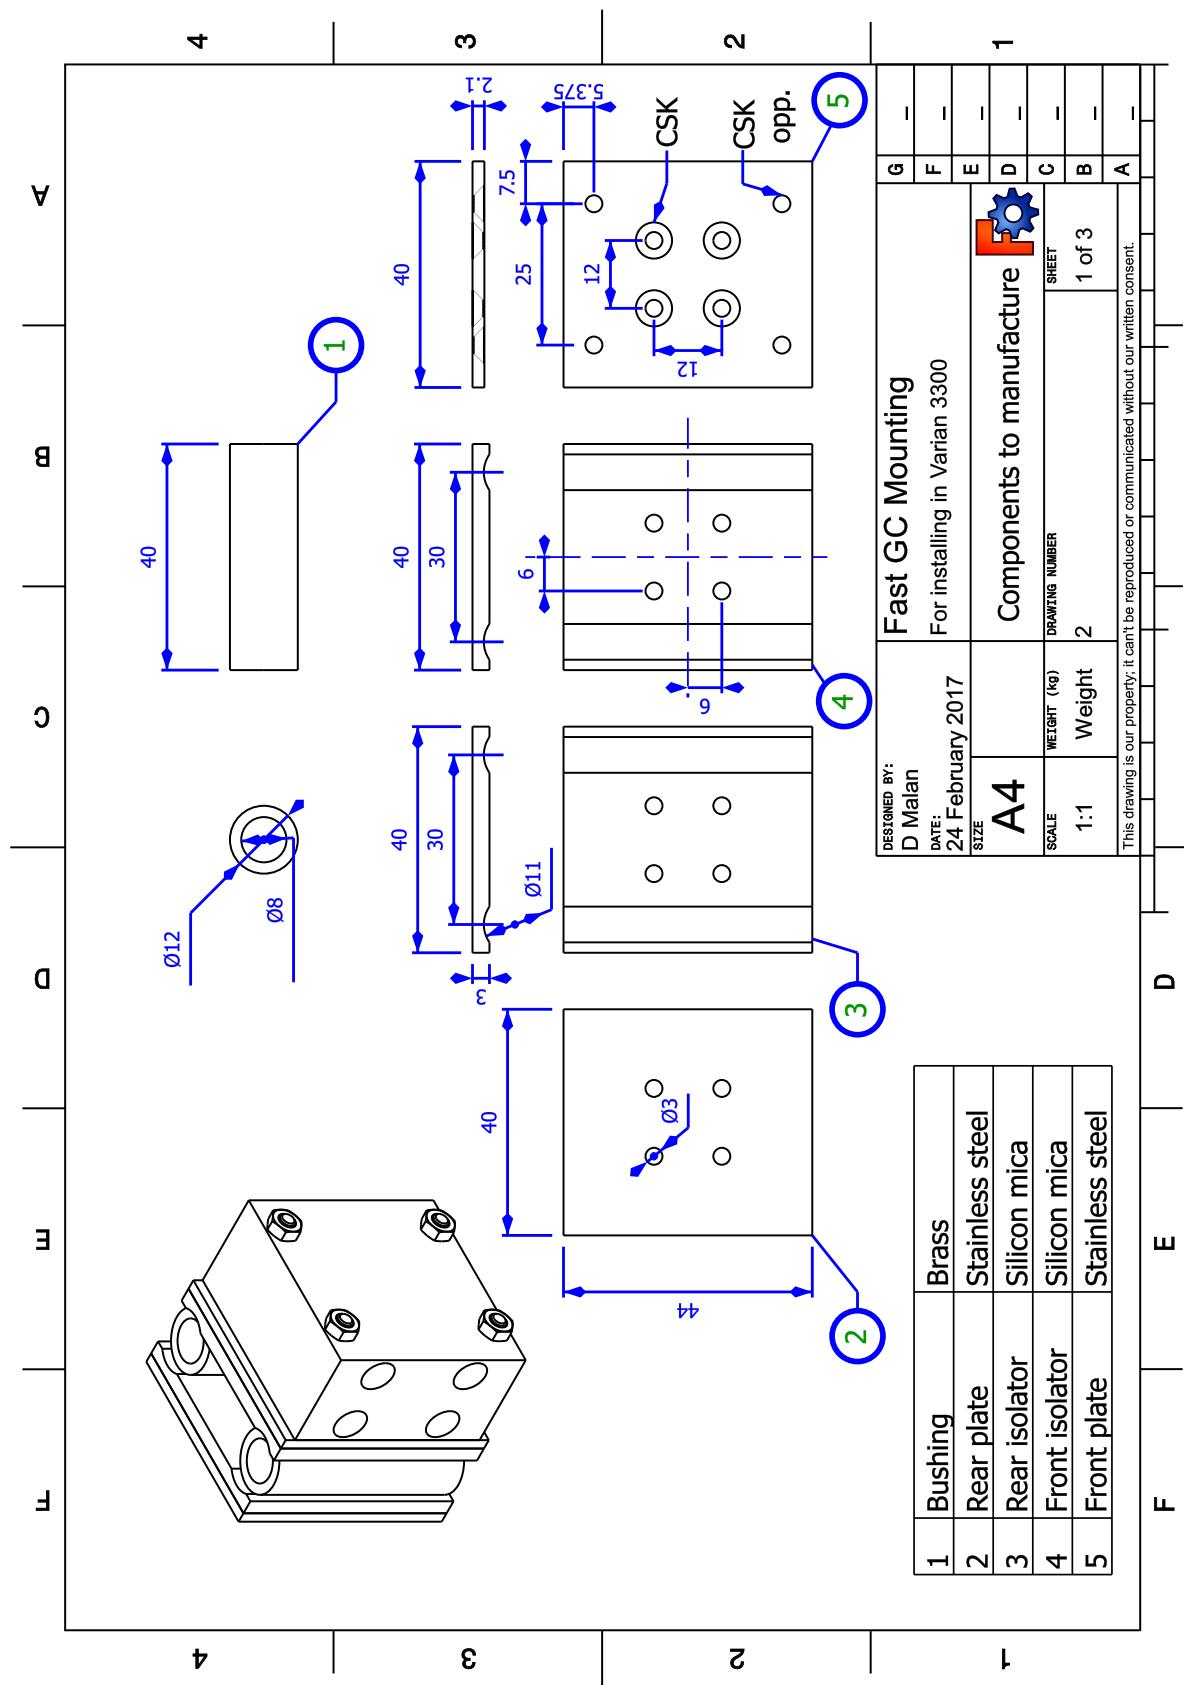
A technical drawing of the T-piece block mounting.
